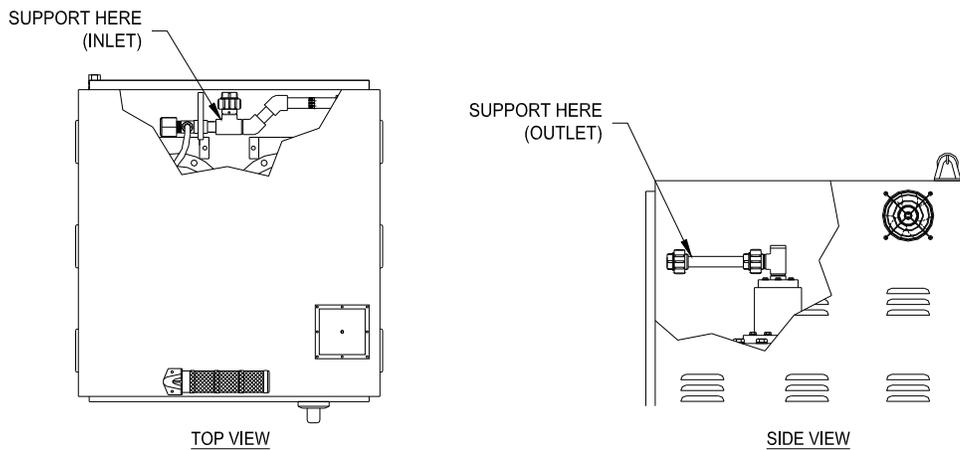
Support Internal Piping when Connecting Plumbing (2-column unit shown)
